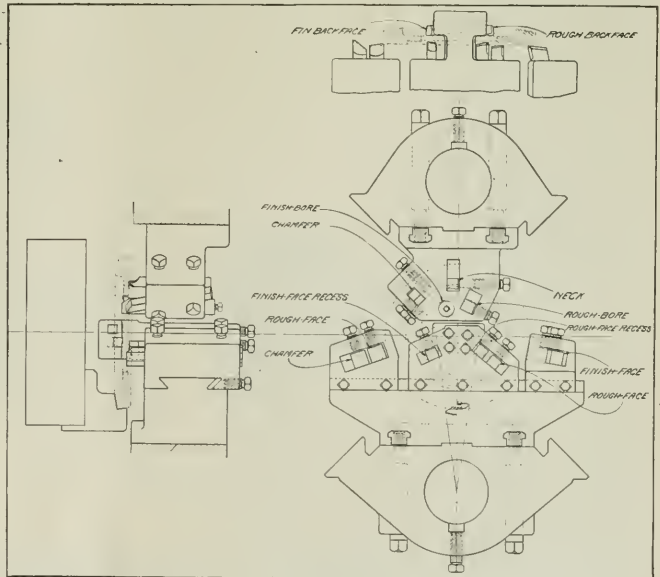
Hartness Automatic set up for machining a Ring Bevel Gear
